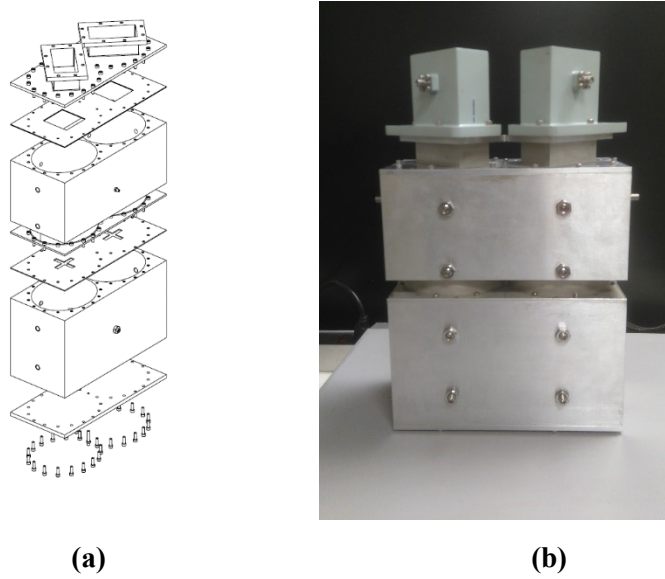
(a) Explosive view of the wide-band dual-band filter assembly and (b) manufactured wide-band dual-band filter assembly.
